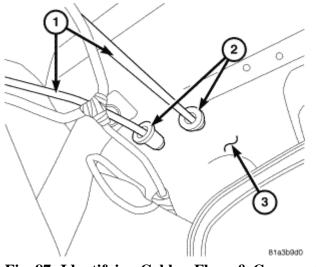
Identifying Cables, Floor & Grommets Courtesy of CHRYSLER LLC
